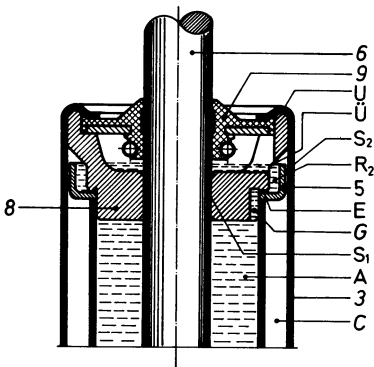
Guide and seal set used by Sachs Boge in series production of twin tube dampers. The finished damper is closed by rolling the outer tube 3 around the edge U of the piston rod guide 8.
